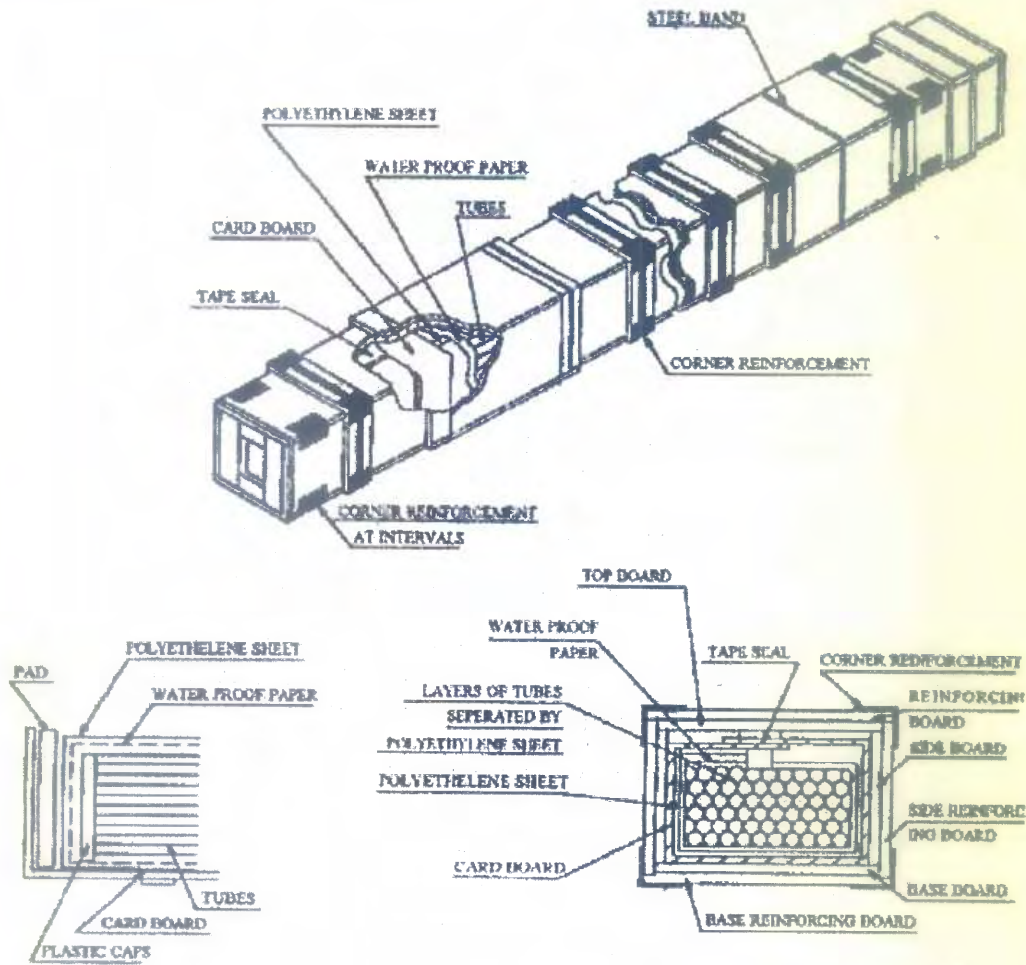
TYPICAL PACKING OF HEAT EXCHANGER TUBES
